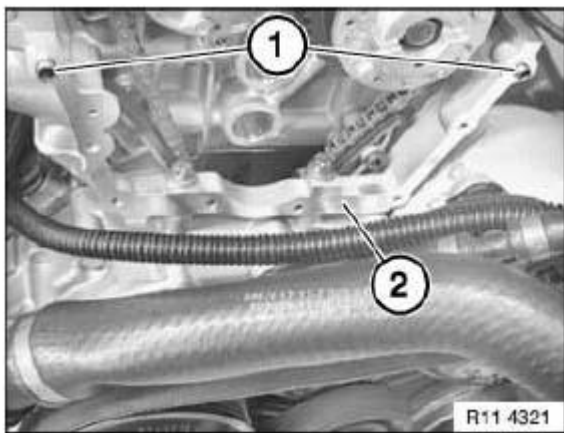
Identifying Adapter Sleeves And Sealing Face
